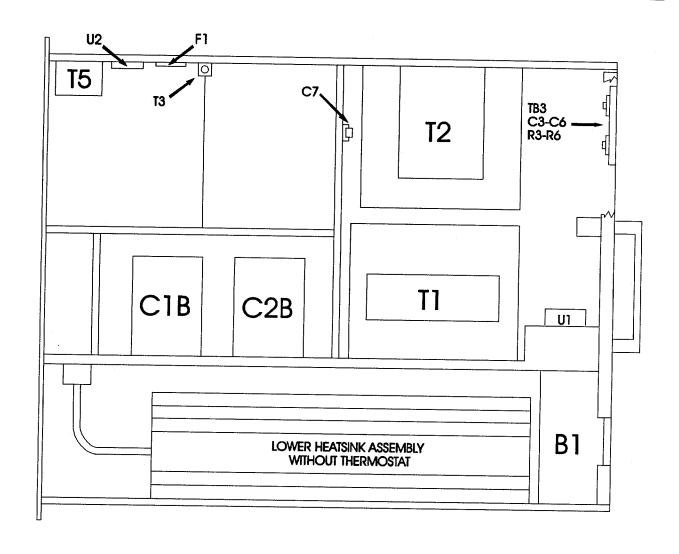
Model 1751SLE (Bottom View, Cover Removed)
